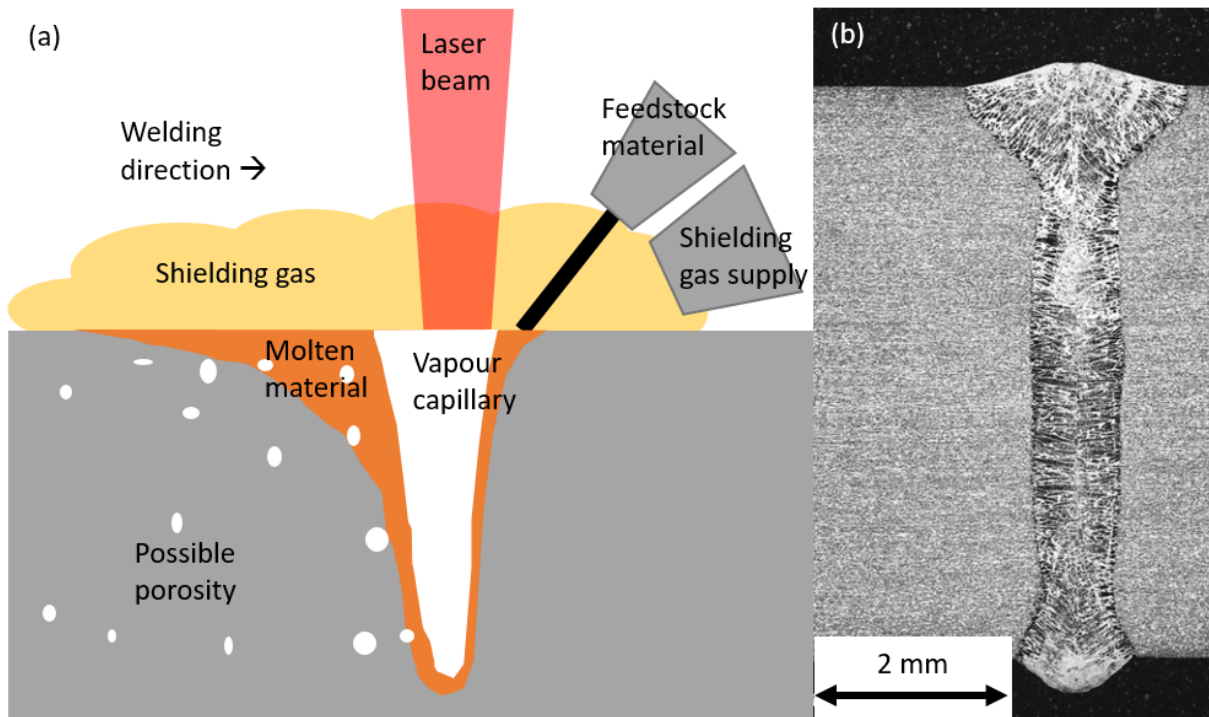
(a) Schematic of the laser beam welding process and (b) cross-section of a laser beam weldment in 6 mm thick duplex stainless steel (depicted and adopted according to [53]).
